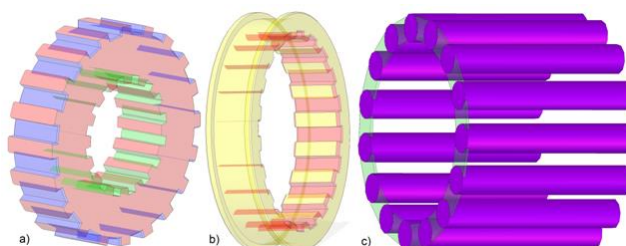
Coupling parts for the indented wheels at the shaft and bearing with pulleys.
